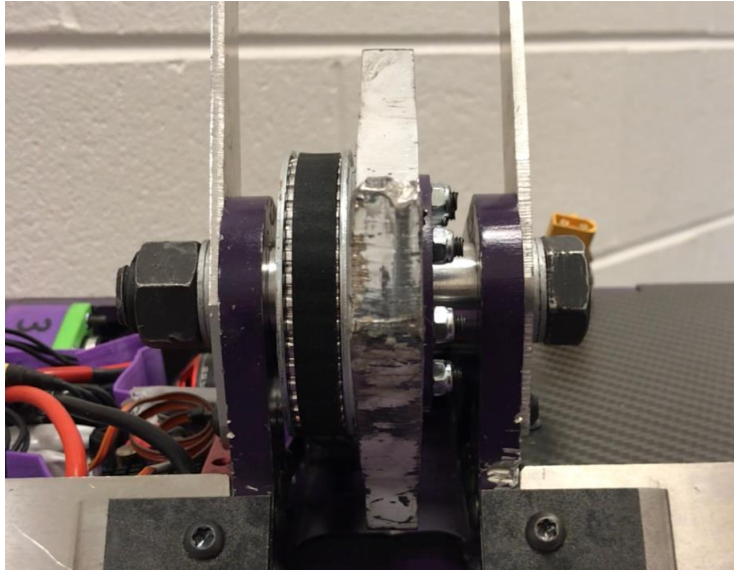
Weapon Stack Up Installed on Weapon Shaft
